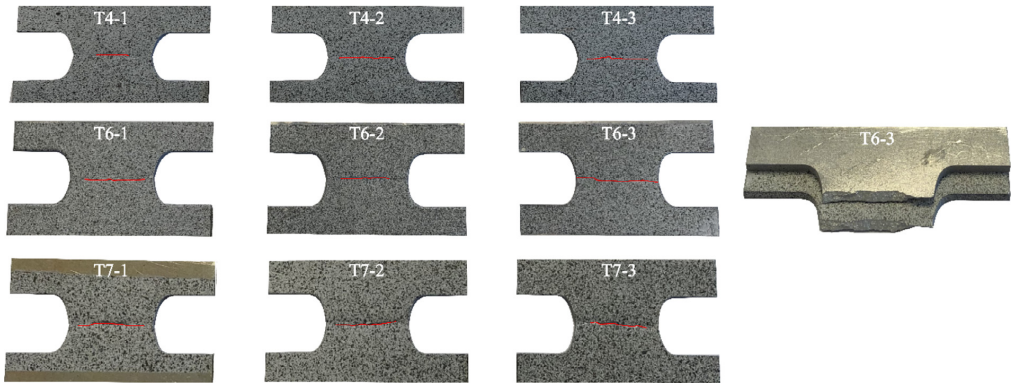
Fractured plane-strain tension specimens and fracture surface of test specimen T6-3. The red lines on the pictures indicate the crack path. (For interpretation of the references to colour in this figure legend, the reader is referred to the web version of this article.)
